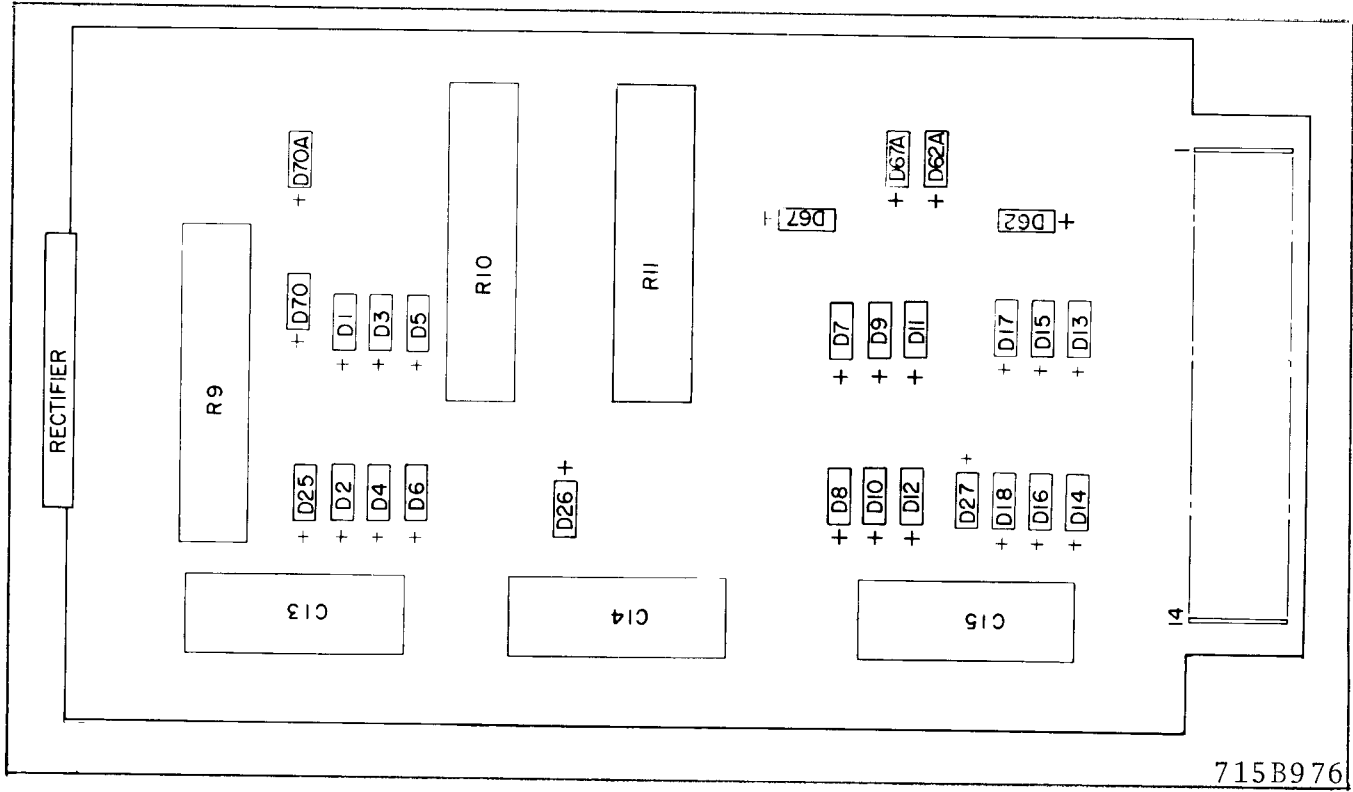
Component Location SDGU-1-2-5-6-7 Rect. Board
